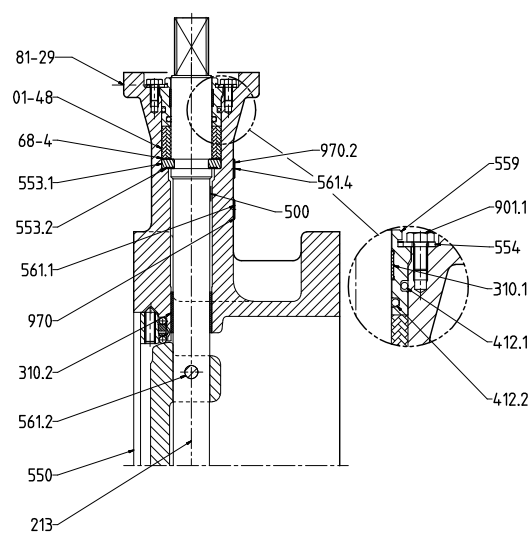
Sectional drawing of DANAIS MT II DN 300 - 600 (12 - 24 inches) / wafer-type body (T1) and full-lug body (T4) / plastomer design
